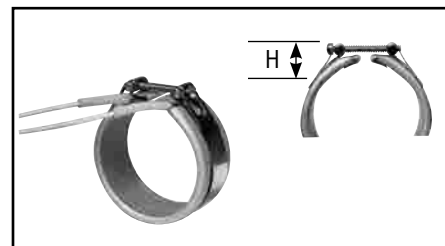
Strap — made from a low expansion alloy to tighten around the whole circumference of the heater. 5/16 socket head bolts included.
